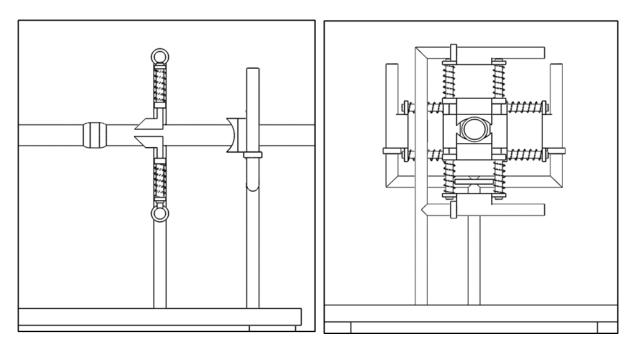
Schematic of stripping machine. Left: side view; right: front view.
